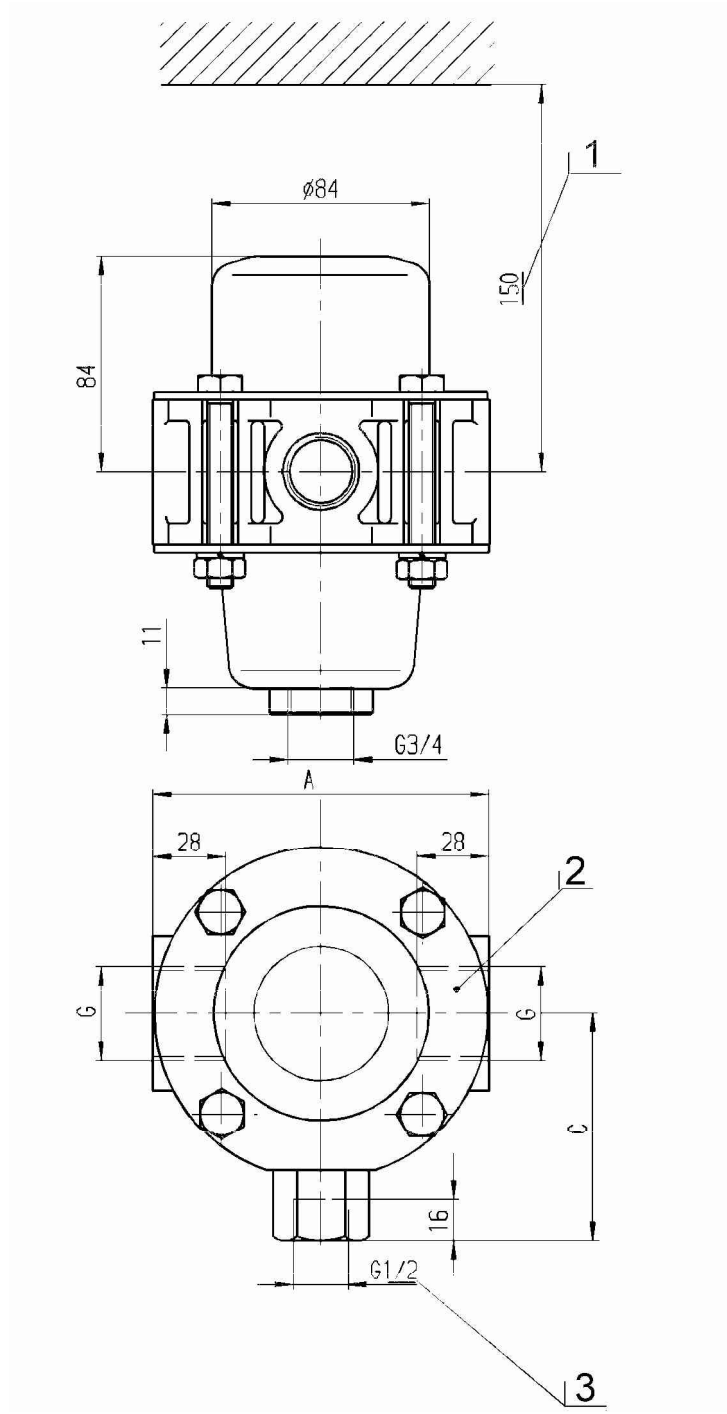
Drip cup with straight pipe passage and top connection for air branch to adjacent point
